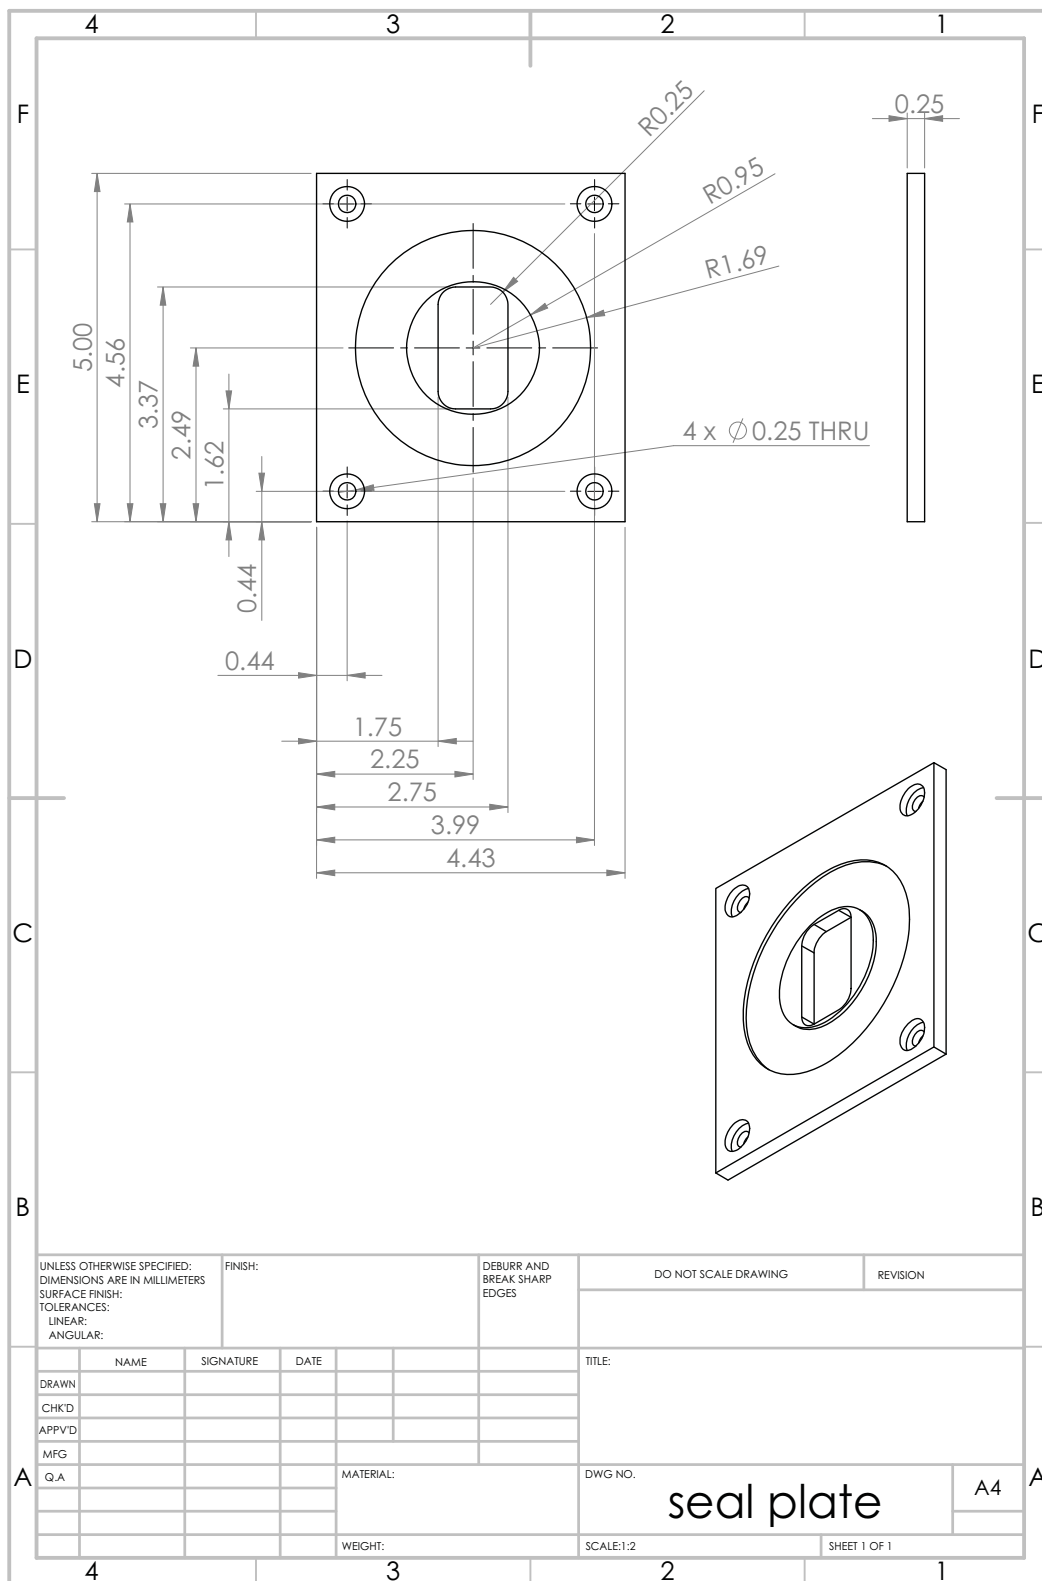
Seal plate for main chamber version 1. This design was not successful, and a new seal plate was machined with O-ring grooves along the rectangular opening on the front and back of the plate as shown in section
